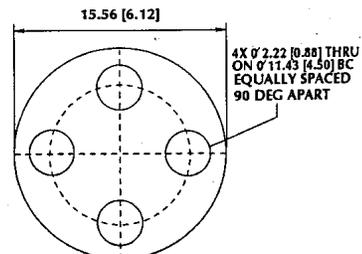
Rotator shaft attachment, Acoustic Pressure Tank Facility
